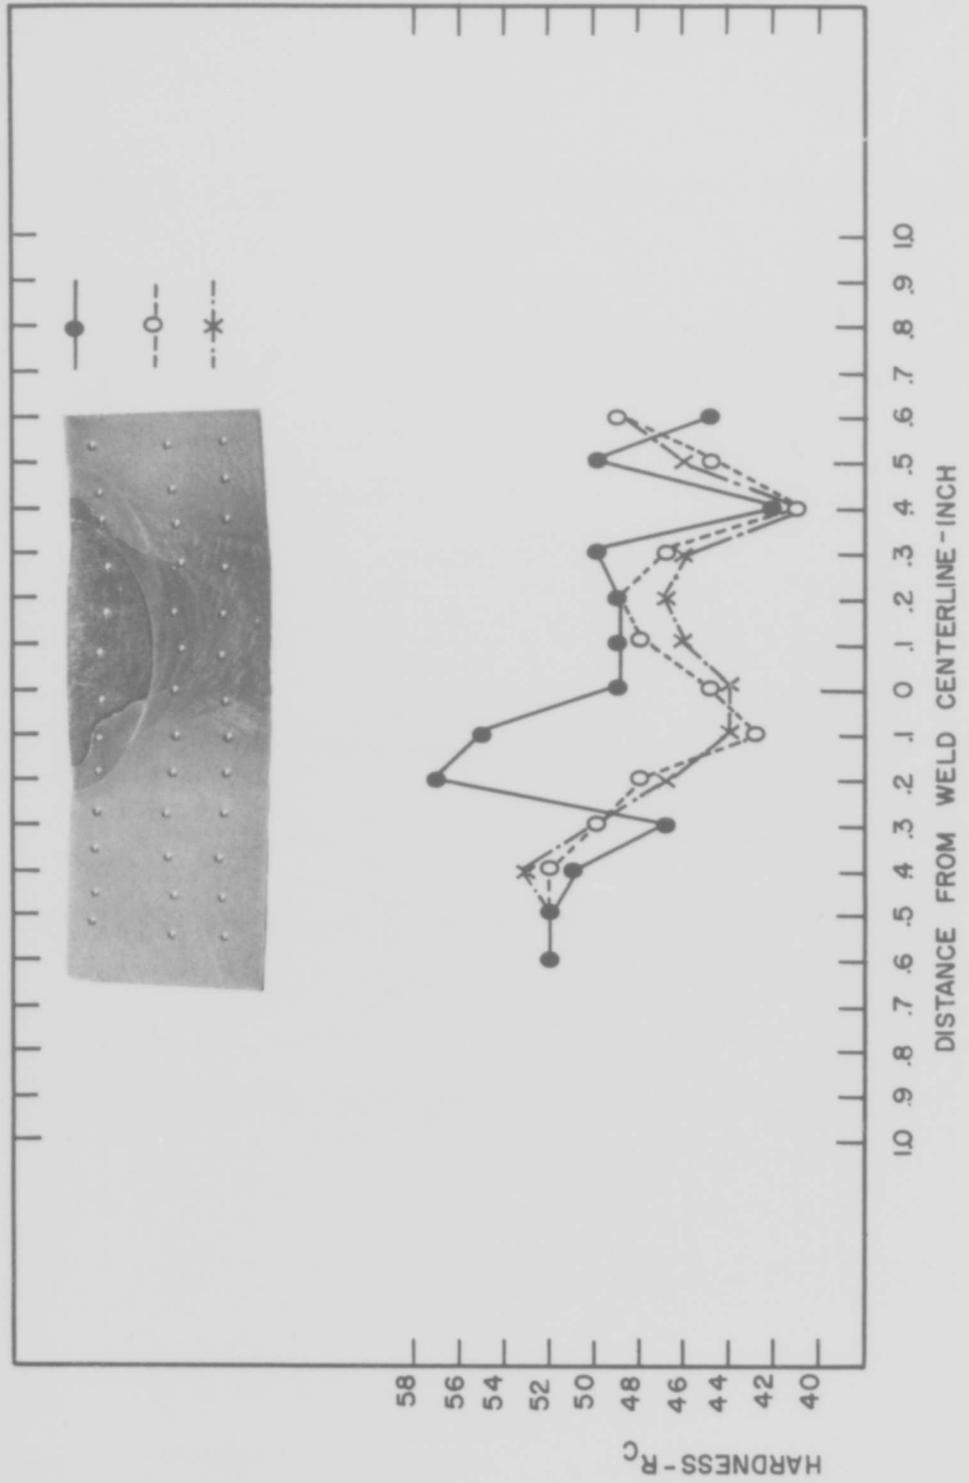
Hardness Survey of TIG Weld No. D237 Made in AMS 6435 Plate Material Tempered at 450°F at a Welding Speed of 10 ipm Using Filler Wire No. 9.
